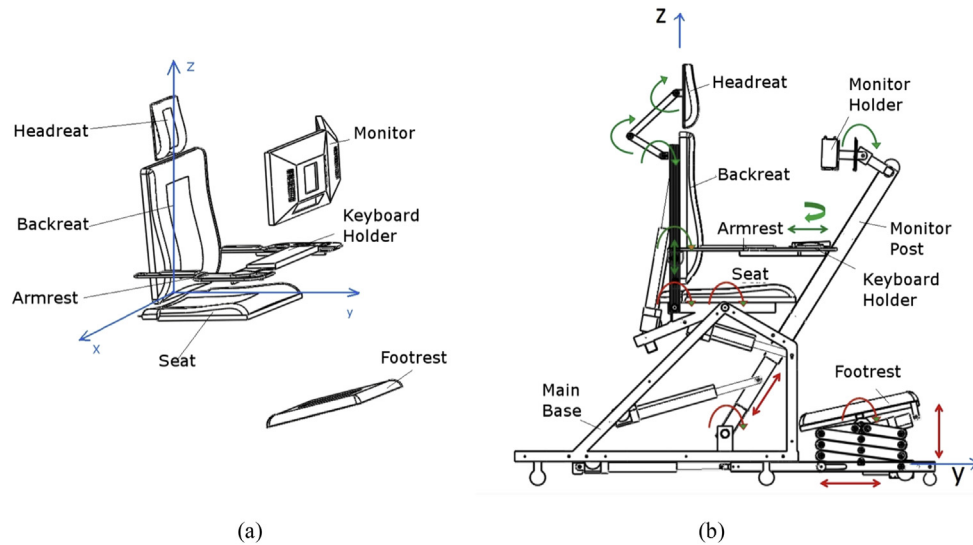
(a) Layout of main parts and axis convention; (b) Assembly of all mechanisms and DOF.
